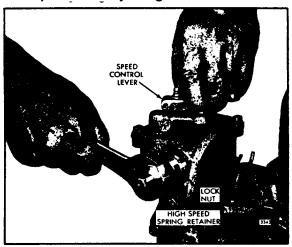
Adjusting Maximum No-Load engine Speed (Type A)
